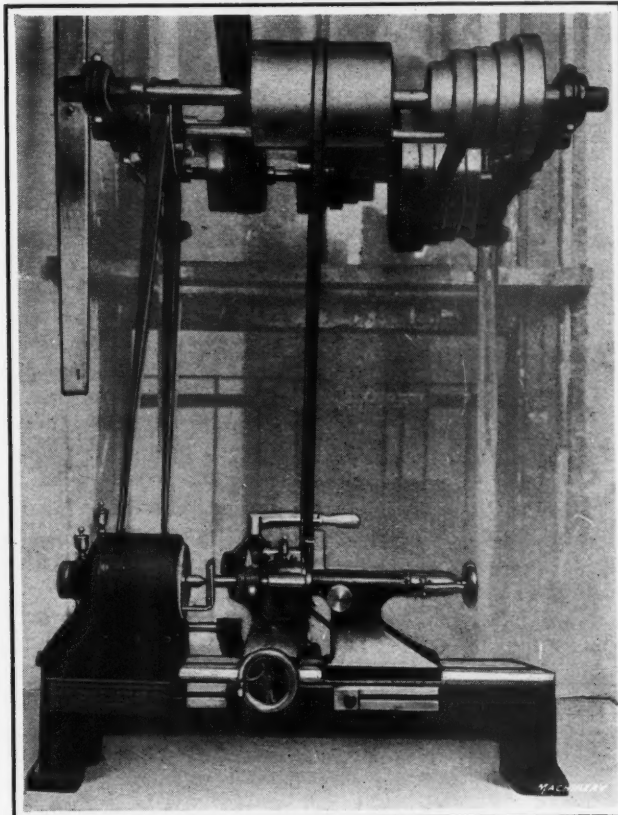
Thread Gage Grinding Machine built by Blair Tool & Machine Works, showing Arrangement of Countershaft
